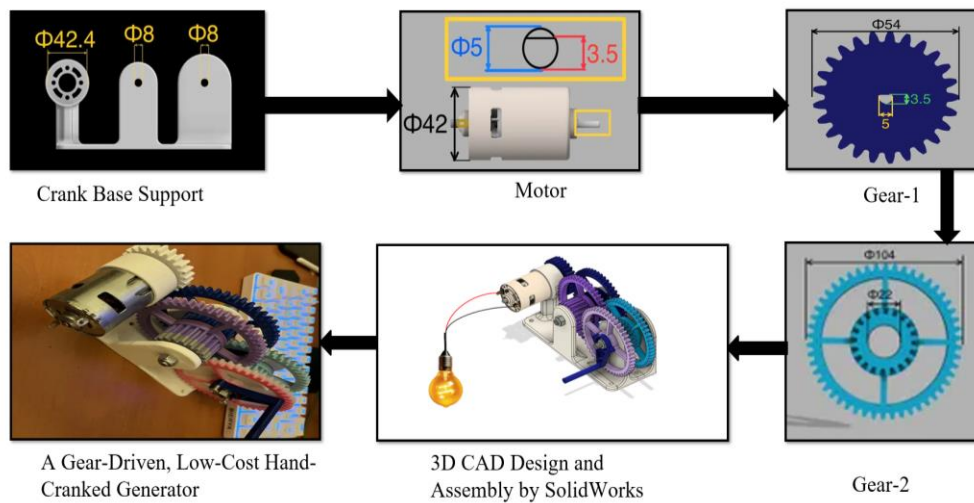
3D CAD Design and Assembly Hand-Cranked Generator Toolkit
